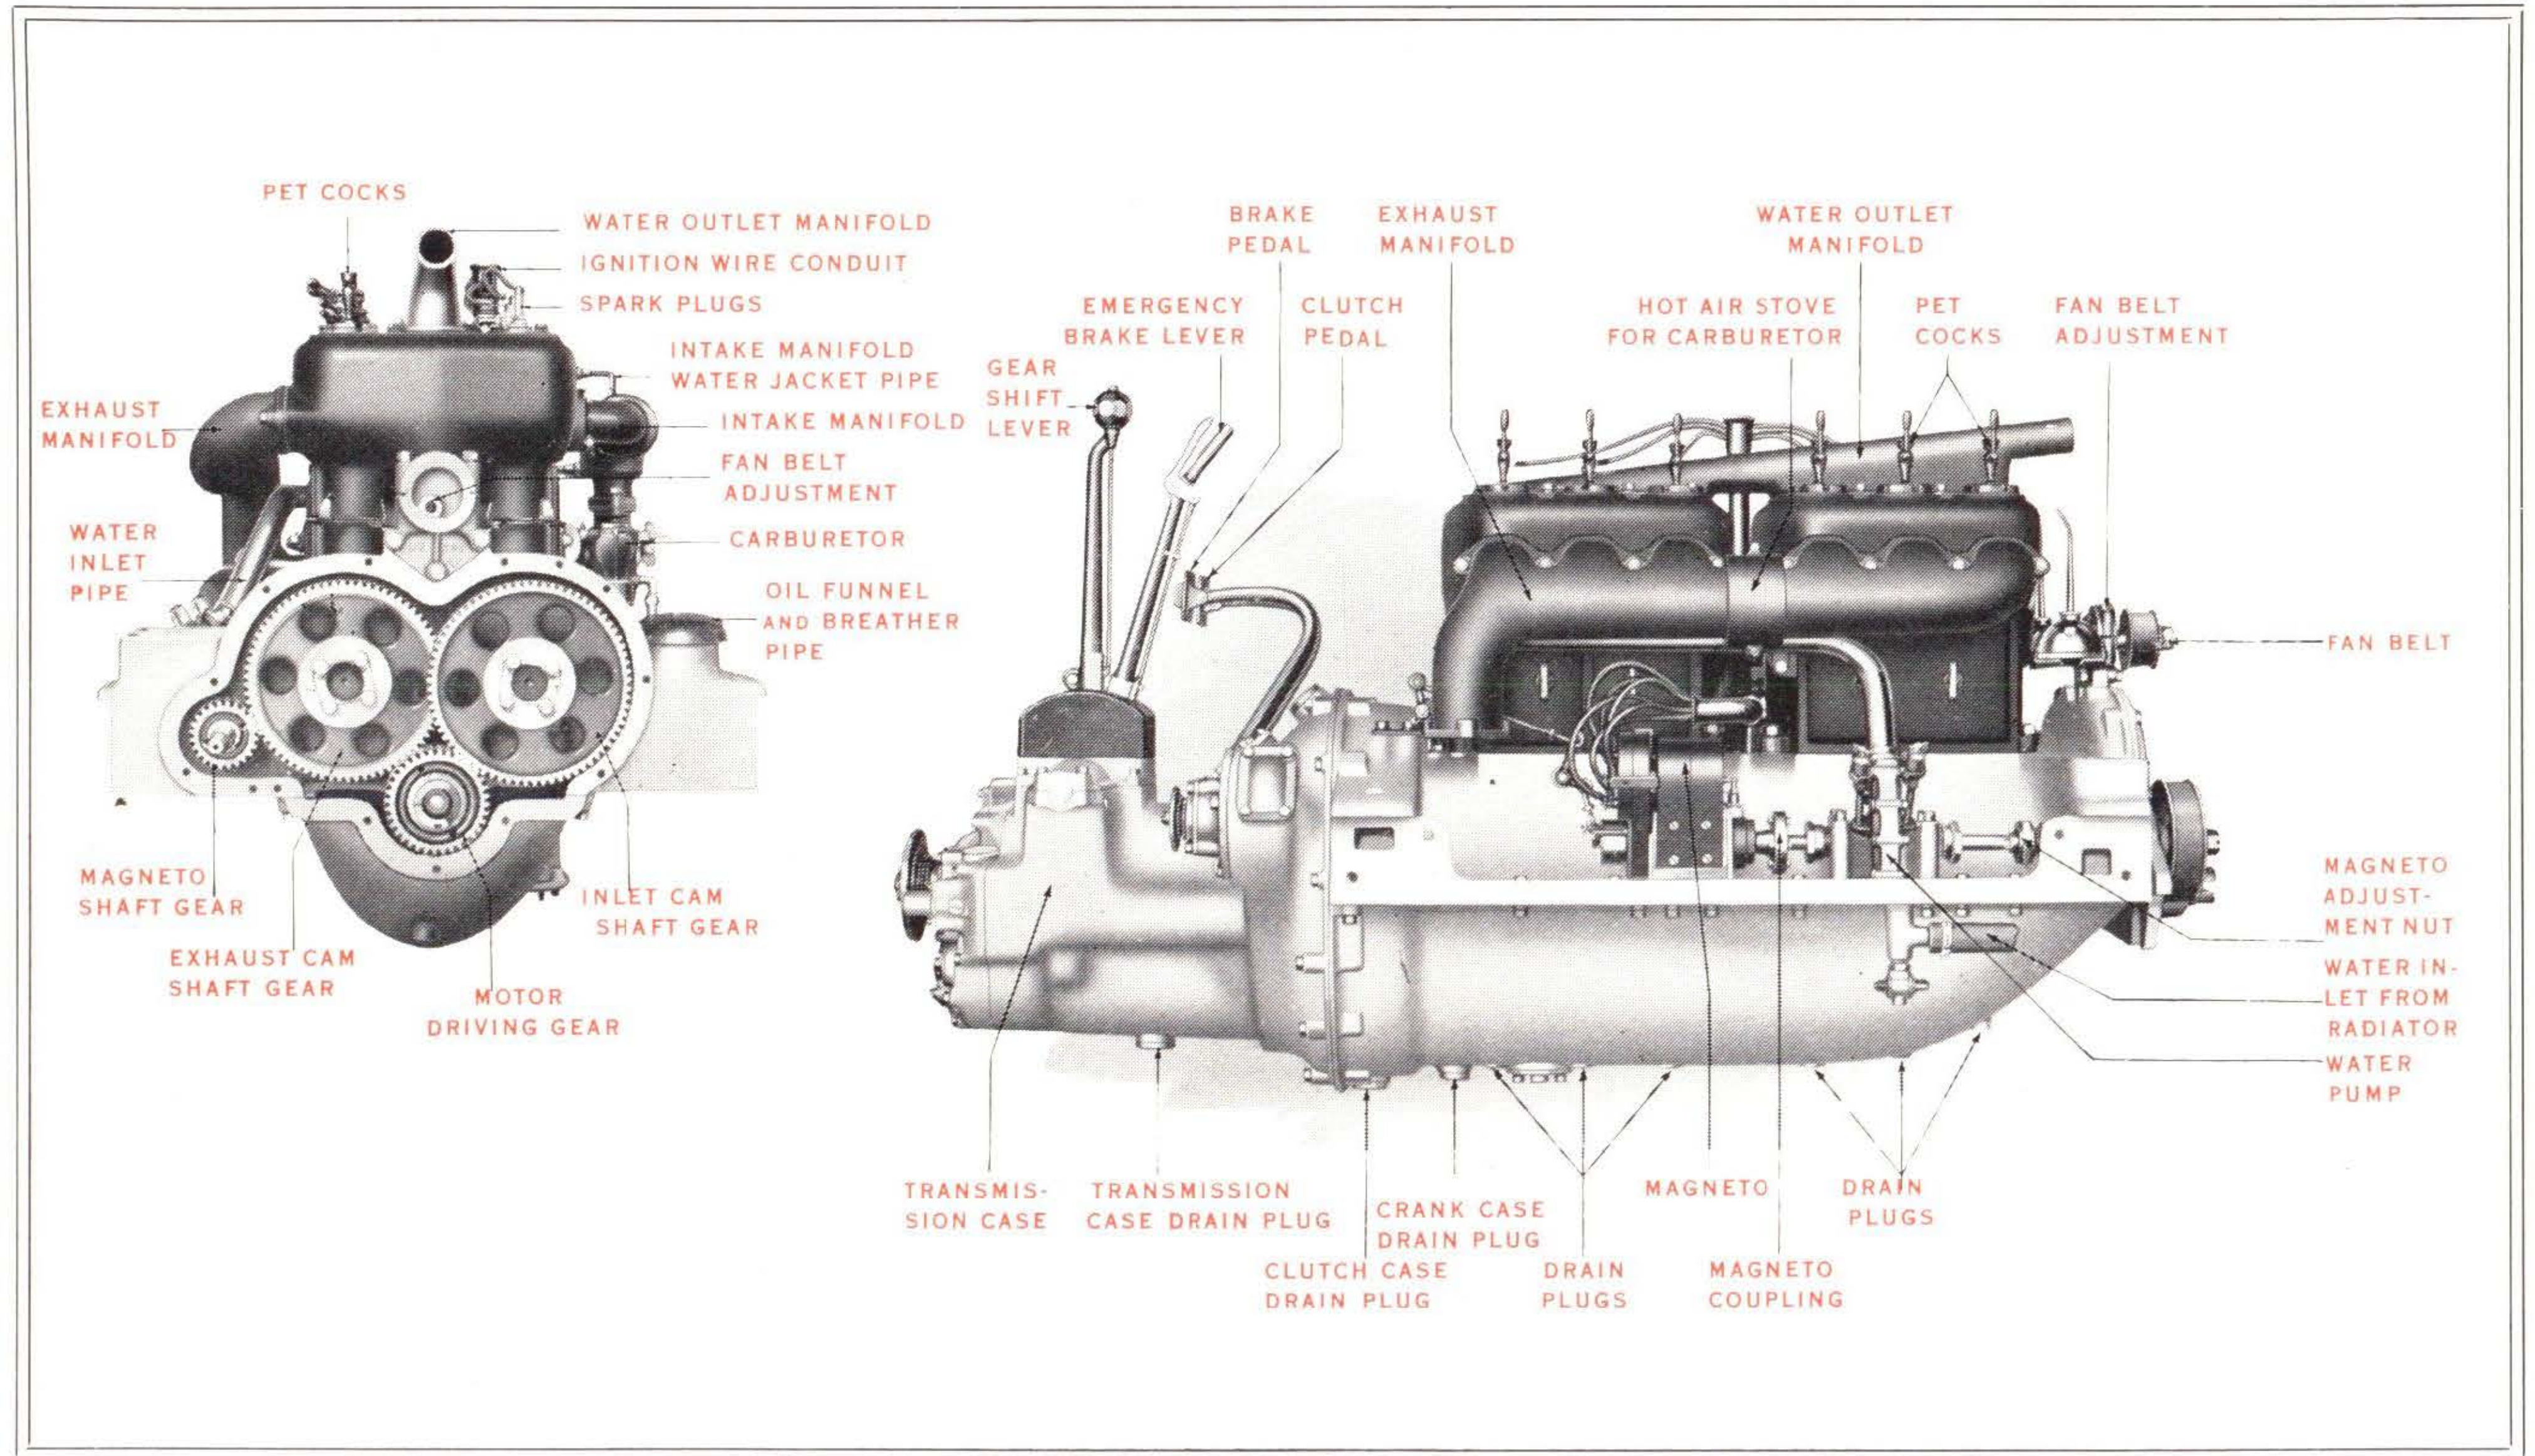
Exhaust Side and Front of the Chalmers "Master Six" (Model 29) Motor
